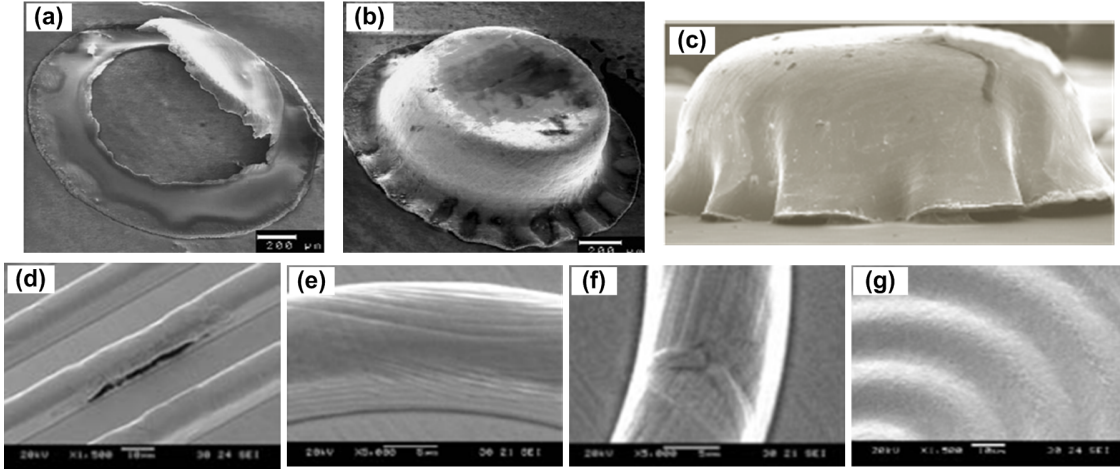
Limitations in microforming processes [8, 36, 52] (a) Bottom fracture (b) Flange wrinkling (c) Wall wrinkling (d) Tearing (e) Slip marks (f) Dented ridges (g) Incomplete filling
